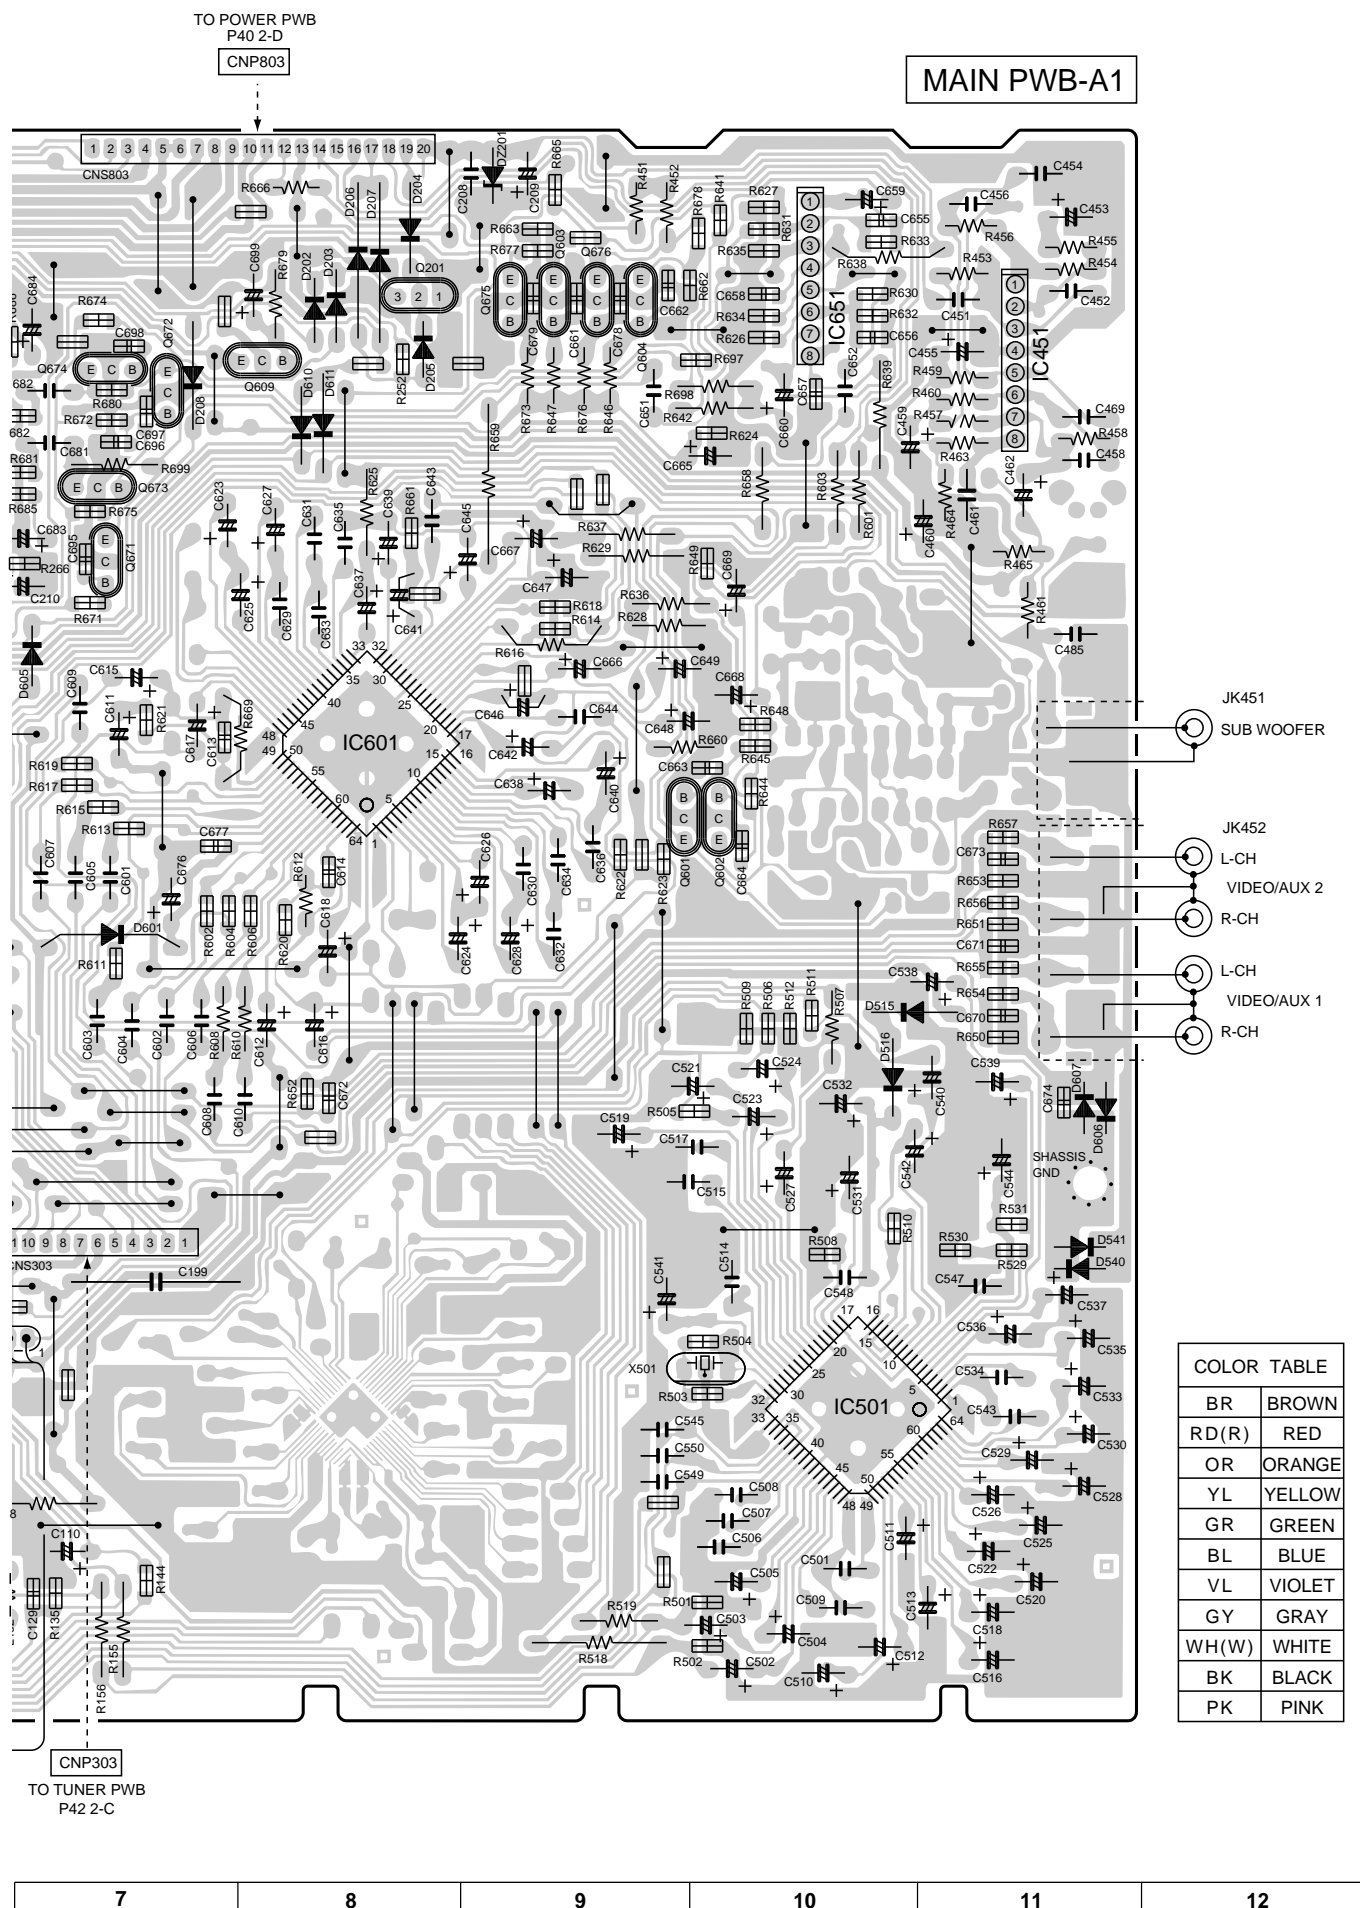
WIRING SIDE OF P.W.BOARD (3/8)
